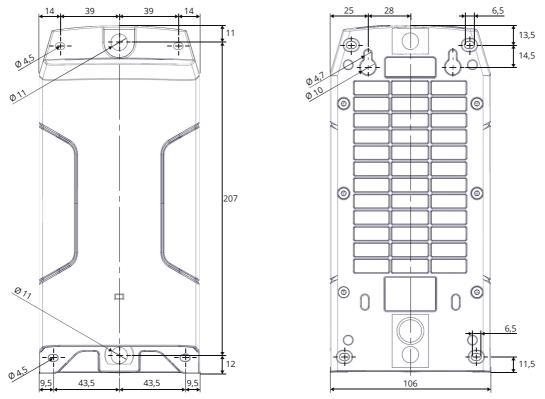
BL-EPS-1005 (top, bottom), dimensions in millimeter
